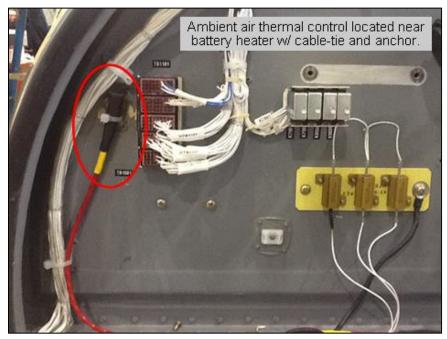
Locate ambient air Thermal Control p/n: TLP3046-05 in battery environment, 6 to 18 inches from battery, secure on existing wiring w/ cable-tie/lace refer to Instruction: TN03046 or use supplied Cable-Tie Anchor p/n: TU02782, refer to Instruction: TN02782.
